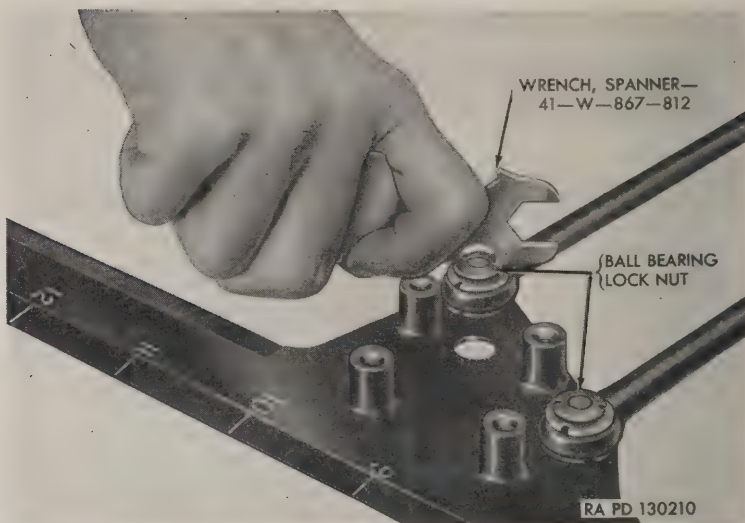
Removing ball bearing lock nut from stud of machine arm—plotting boards M5 and M5A2 (M5 shown).
